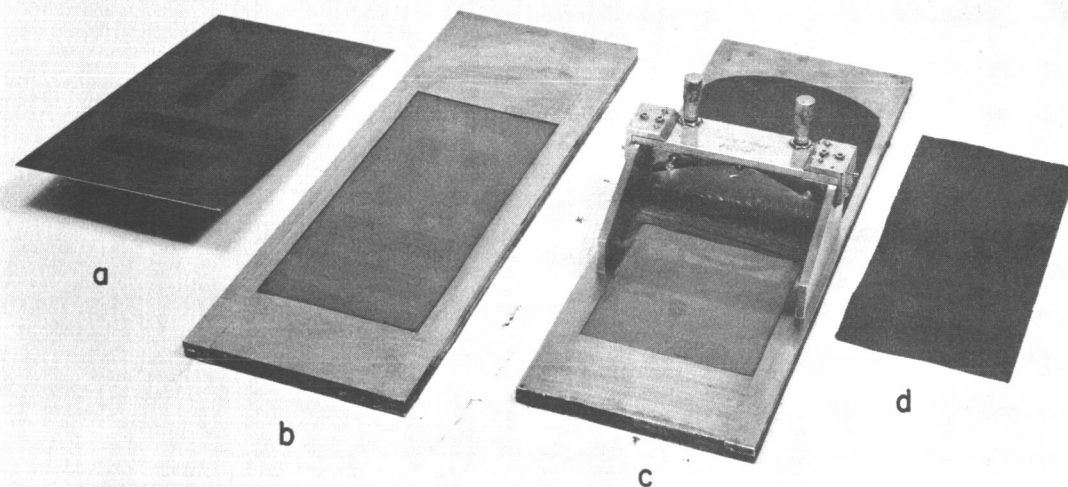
Doctor blading ferrite slurry over rubber masters to make grooved sheets.
